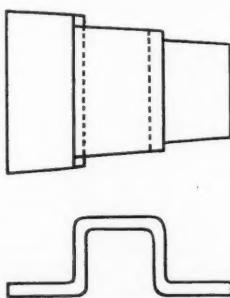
The sides of the original, flat blank were kept straight in making this bent metal workpiece.
